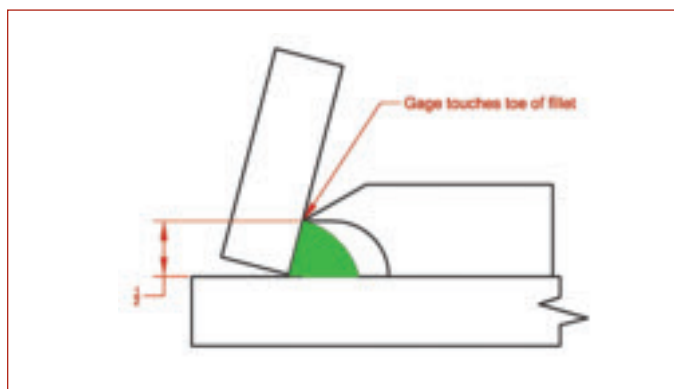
Modified fillet weld gauge used for measuring the leg of the fillet weld in a skewed joint.
